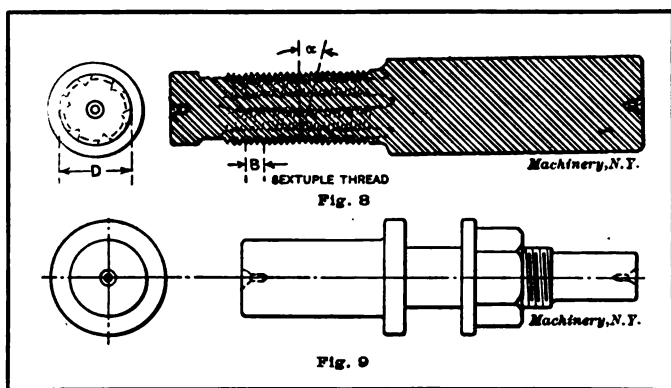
Hob used for Cutting Concave Knurls in the Milling Machine
